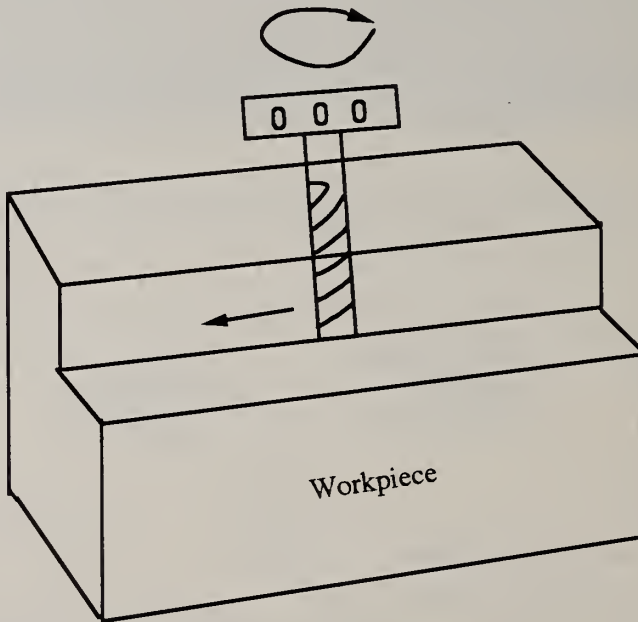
Schematic illustration of cutting tests by diamond-coated end mills.
